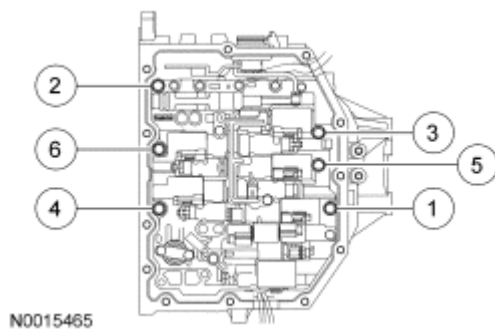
Identifying Main Control Valve Body Bolts Sequence
